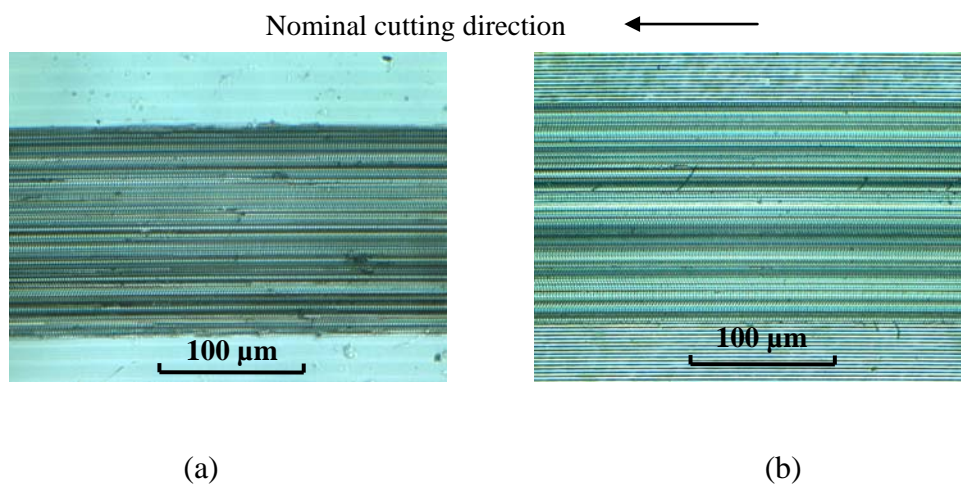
Microscope photographs ( $\times 1000$ ) of the machined grooves under the EVC method on the workpieces made of: (a) Aluminum alloy, (b) Hardened steel.
